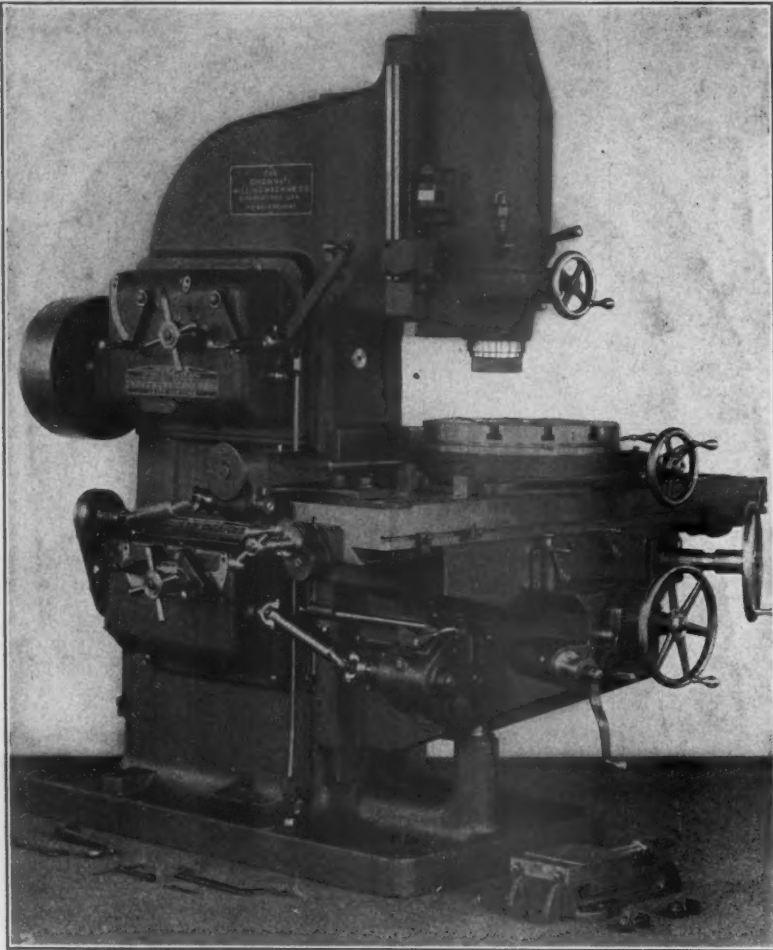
VERTICAL MILLING MACHINE, CONSTANT SPEED BELT DRIVE, CIRCULAR MILLING ATTACHMENT.
